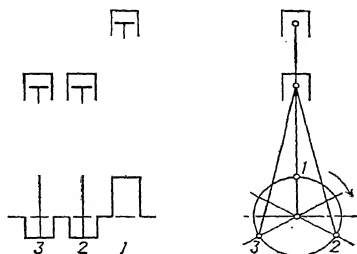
Crank arm arrangement for the three-cylinder in-line engine.
